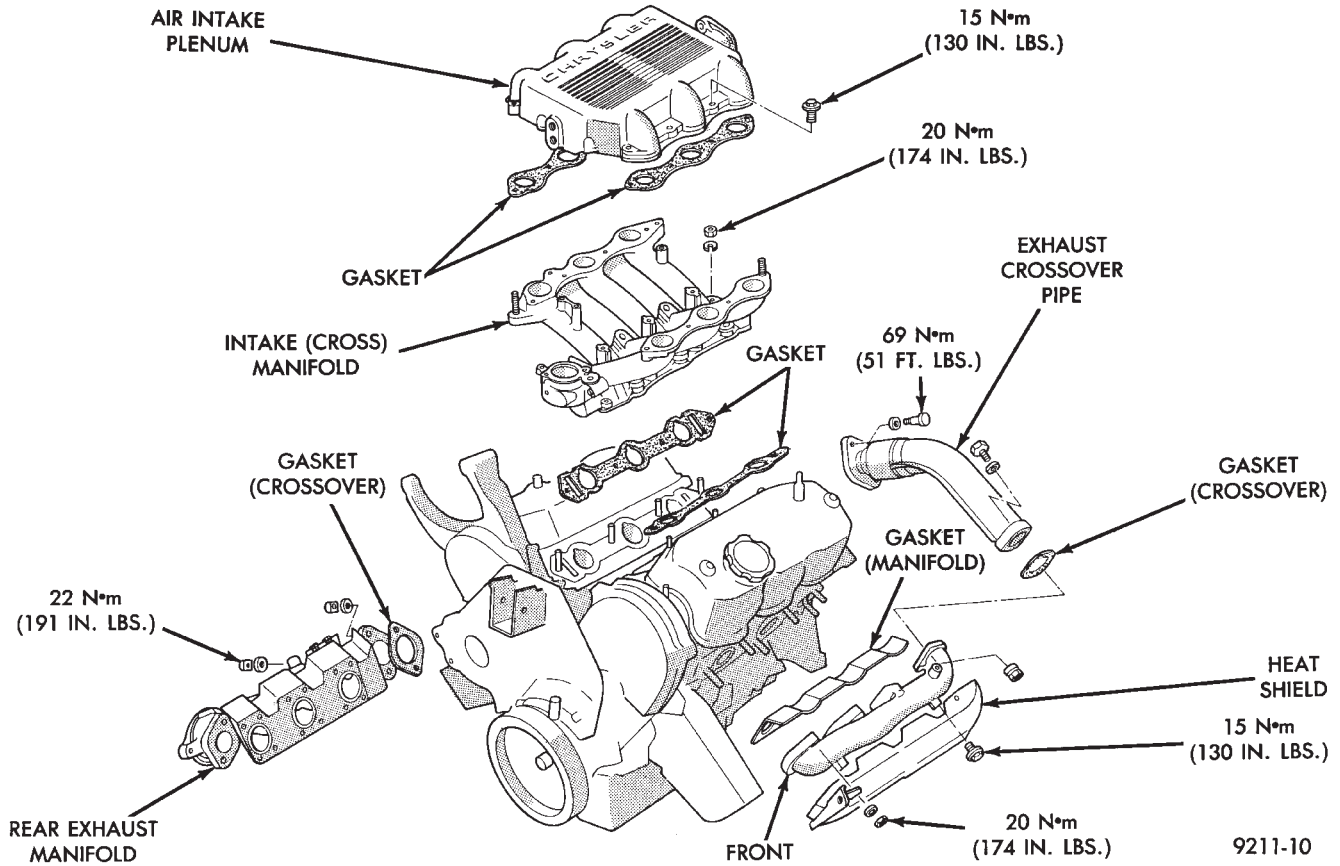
Intake and Exhaust Manifolds — 3.0L Engine
